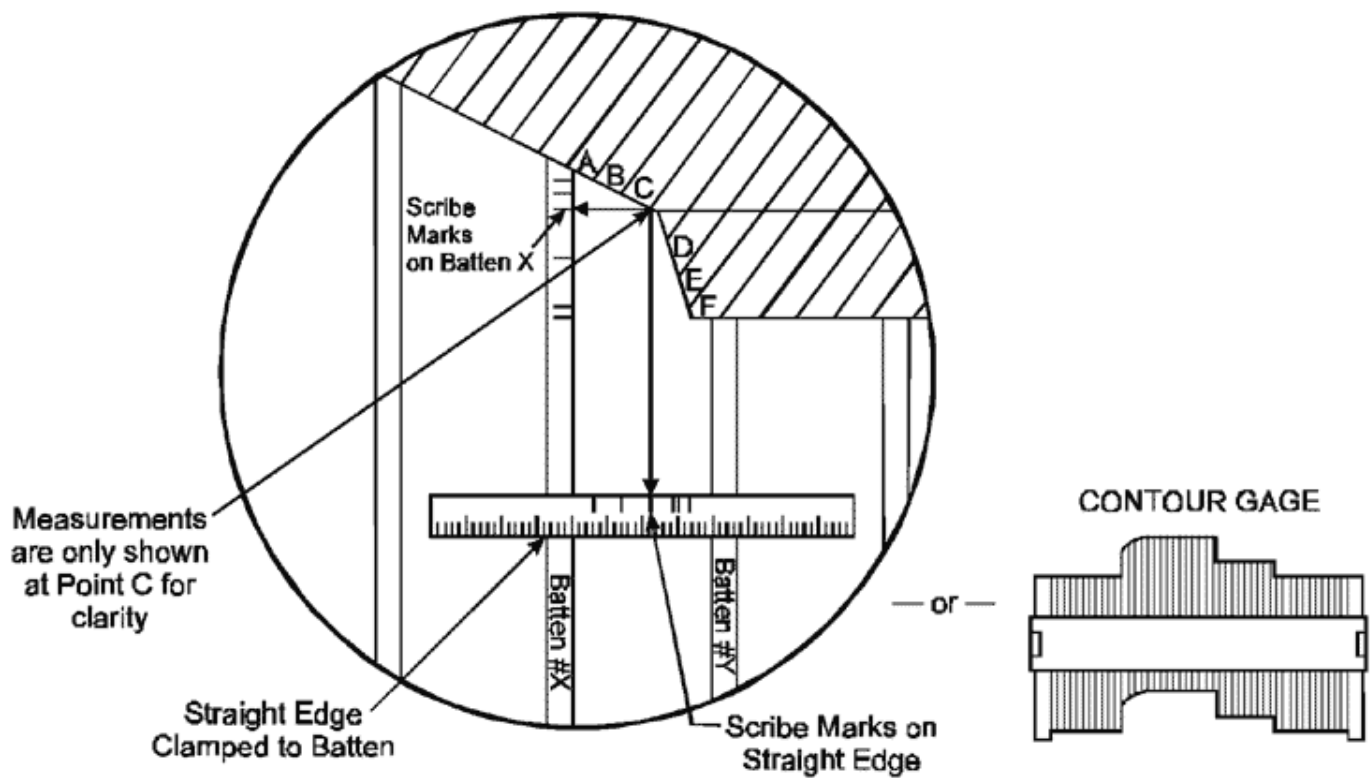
NAVSEA Drawing 6698079 - Contour Template Fixture. 16-43 (16-44 blank)
